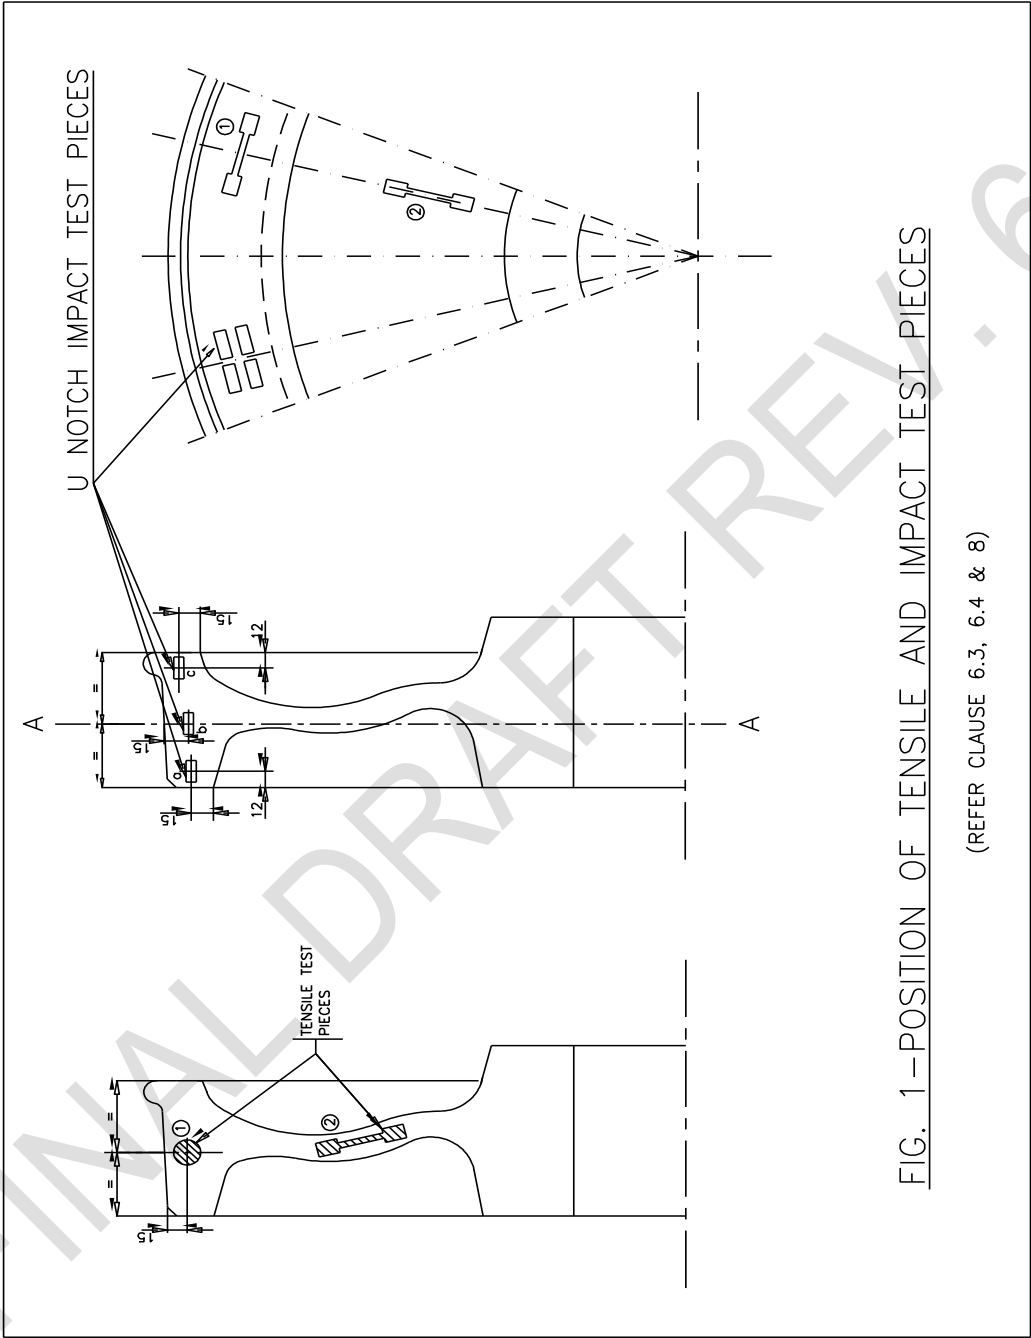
POSITION OF TENSILE AND IMPACT TEST PIECES
